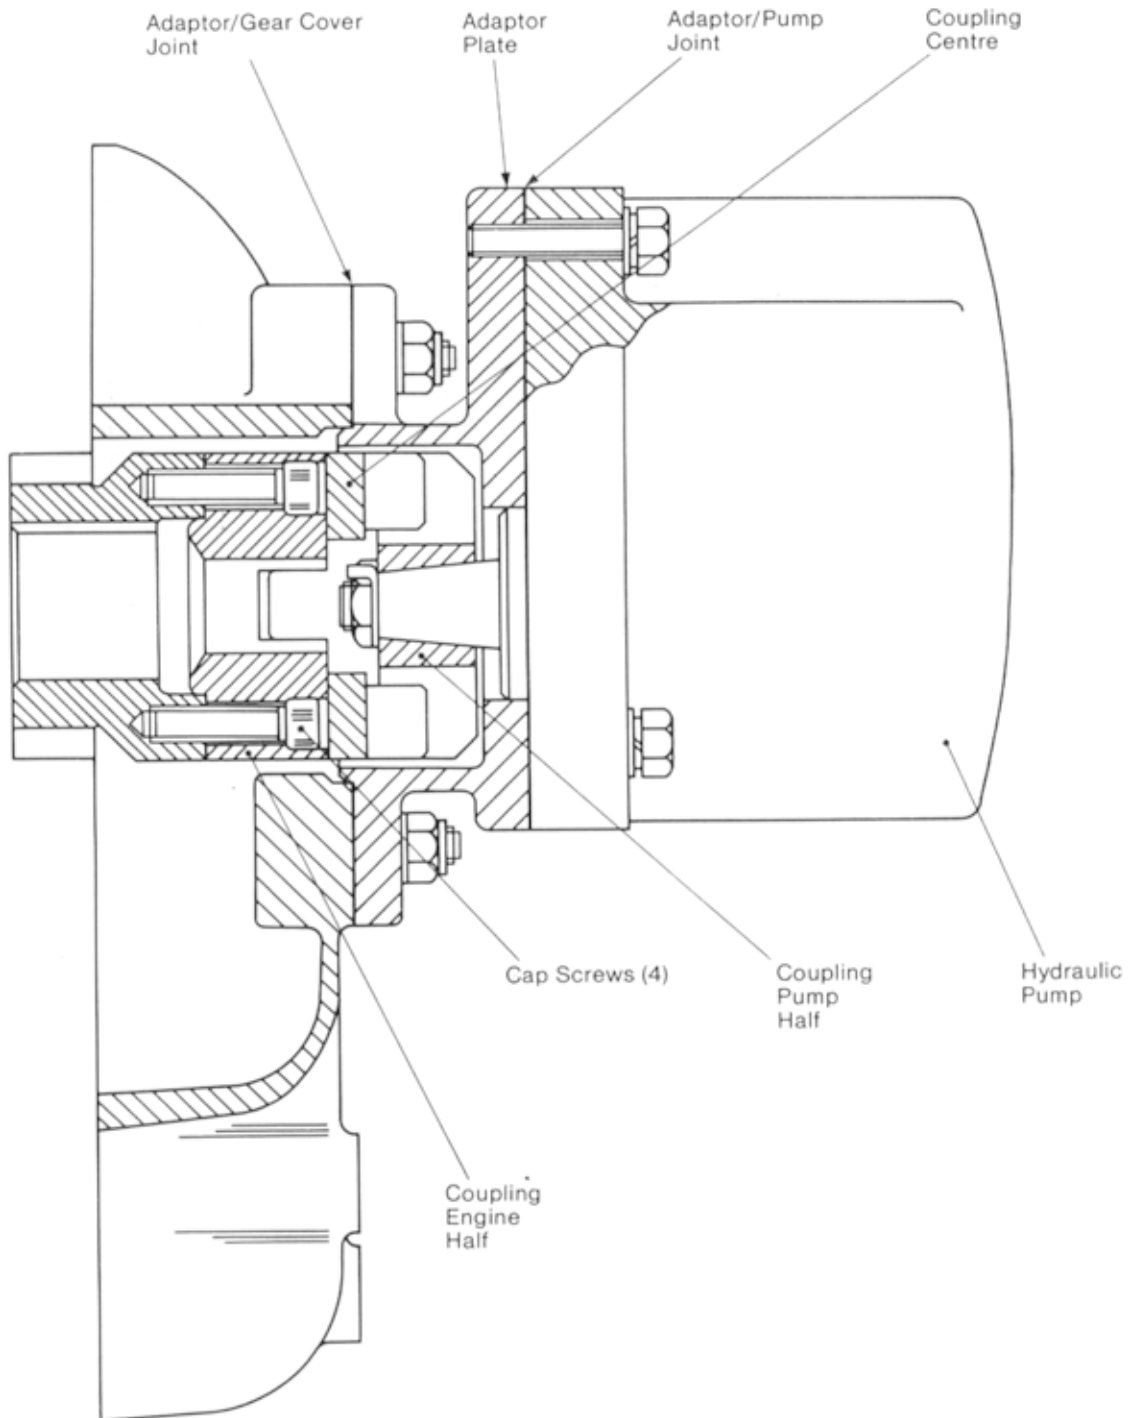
Hydraulic Pump Coupling-Gear End : Sectional View.
